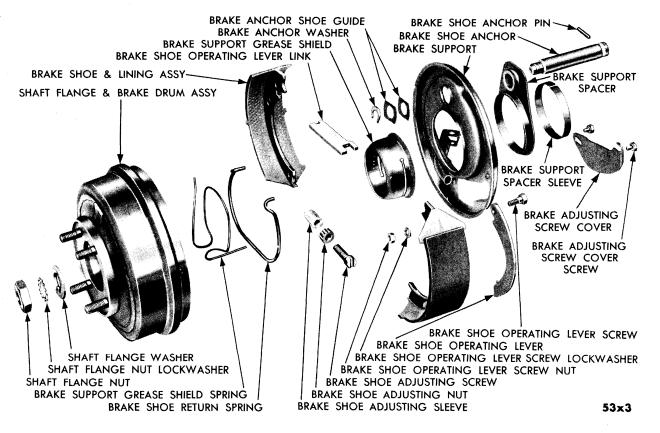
Hand Brake (Internal Expanding Type) (Disassembled View)
